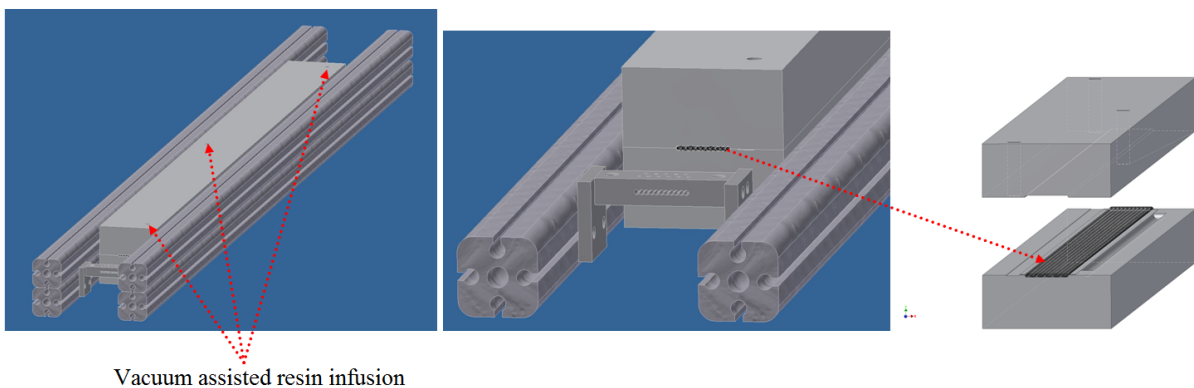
Development of the design for an aluminium tool for the vacuum assisted resin infusion
